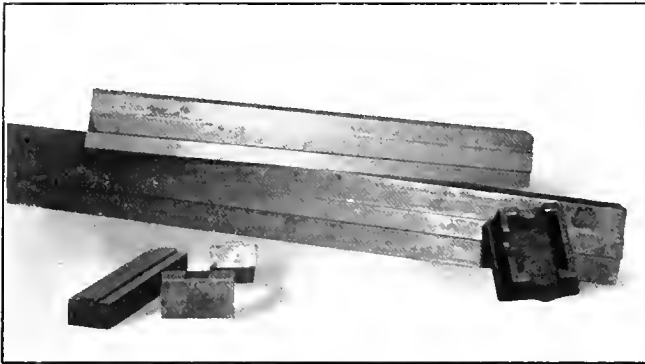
Steel Bars from which Pieces are cut for making False Jaws.
